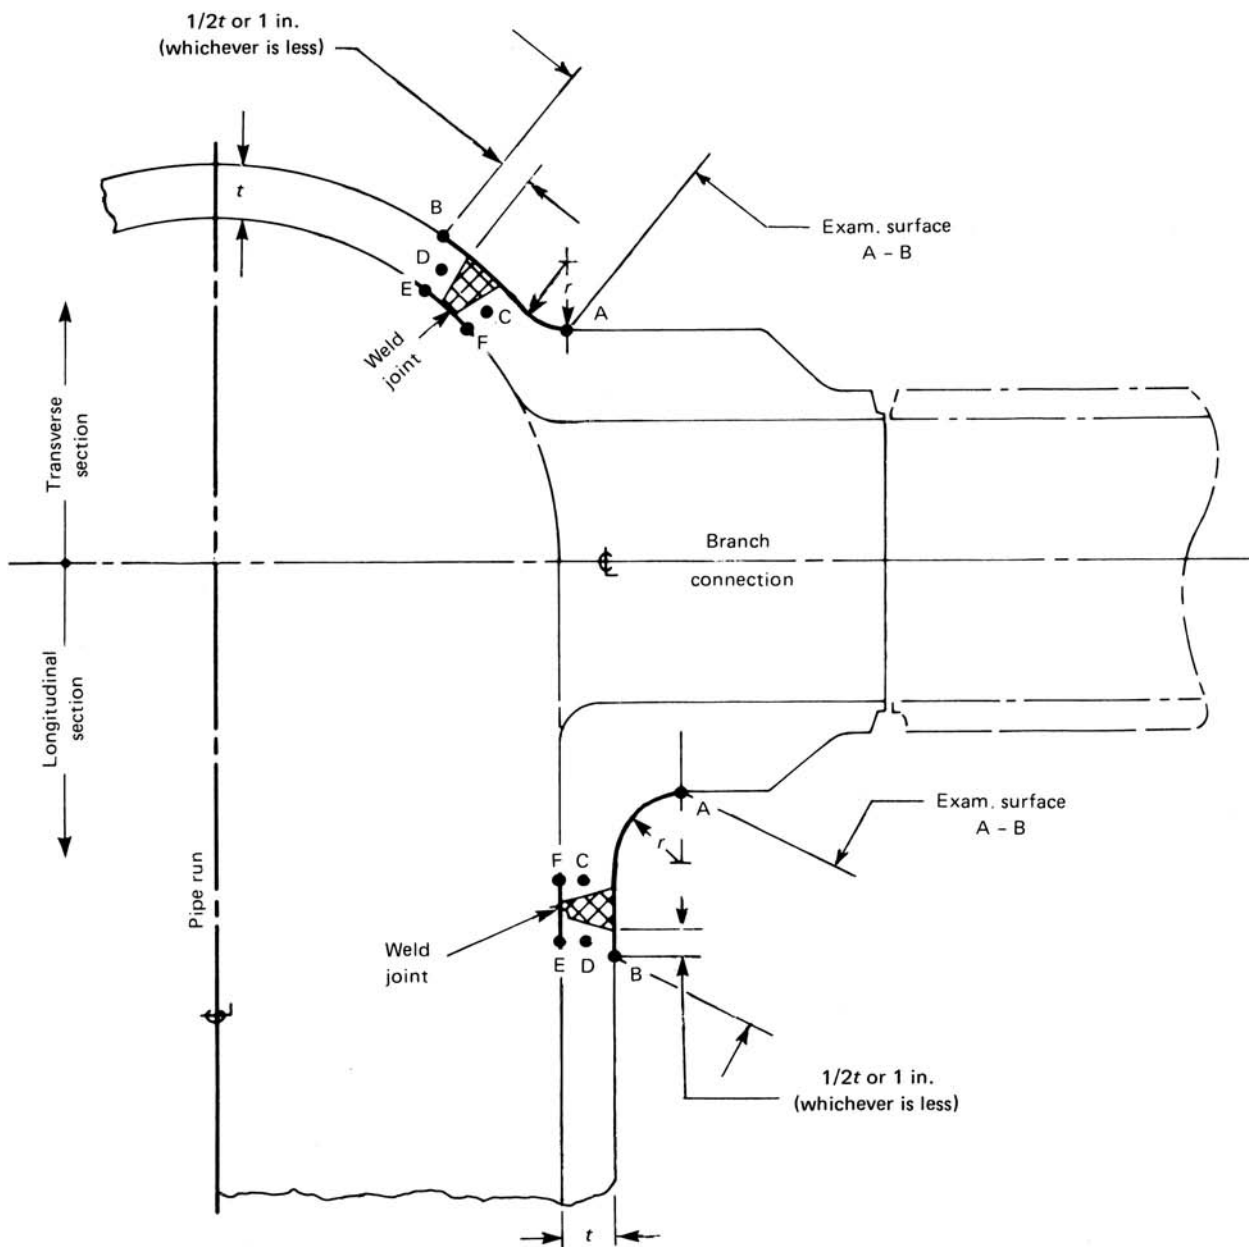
SIMILAR AND DISSIMILAR METAL WELDS IN COMPONENTS, NOZZLES, AND PIPING (CONT'D)
